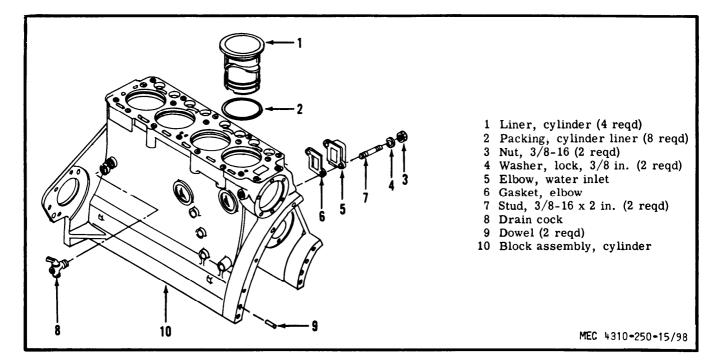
Cylinder and Cylinder Block Assembly, Disassembly and Reassembly.
